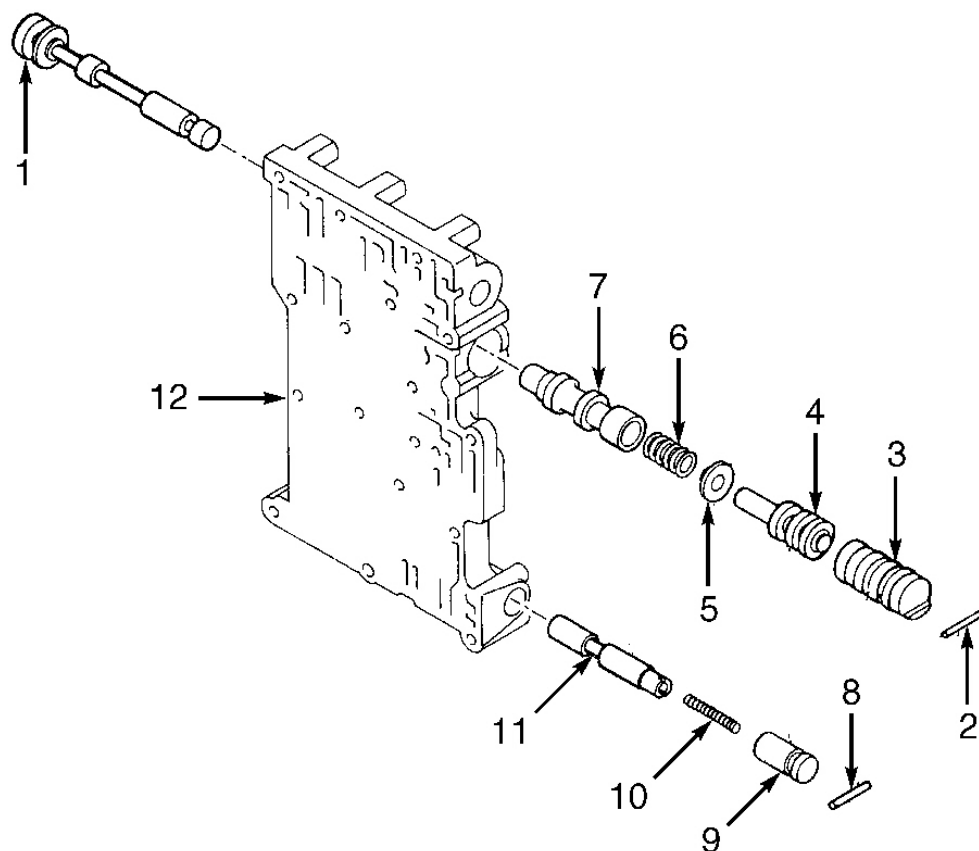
Exploded View Of Pre-Main Valve Body (FA4A-EL - 1 Of 2)
